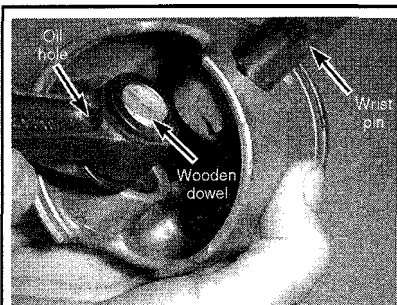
Make sure the connecting rod oil hole and piston are facing the proper direction...
